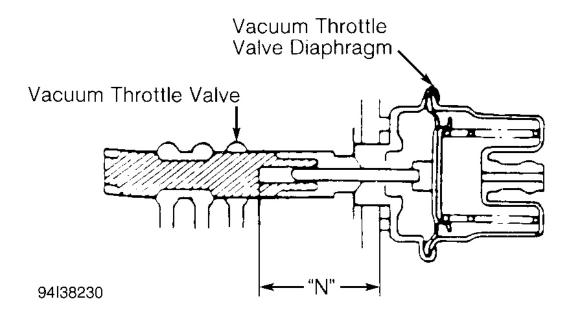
Measuring Vacuum Throttle Valve Depth Courtesy of FORD MOTOR CO.
